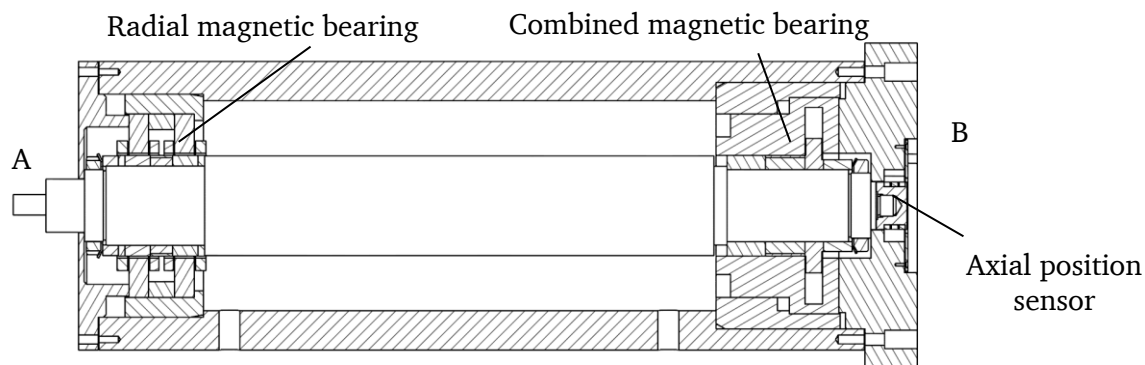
Configuration of the prototype for the magnetic bearing testing under atmospheric pressure, including a shaft and radial magnetic bearing (A-side) and a combined magnetic bearing (B-side) without mechanical bearings or an E-machine [47]
